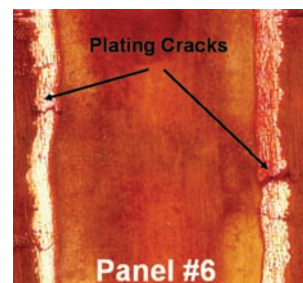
Sample of Barrel Crack Failure, Advanced FR4A.
